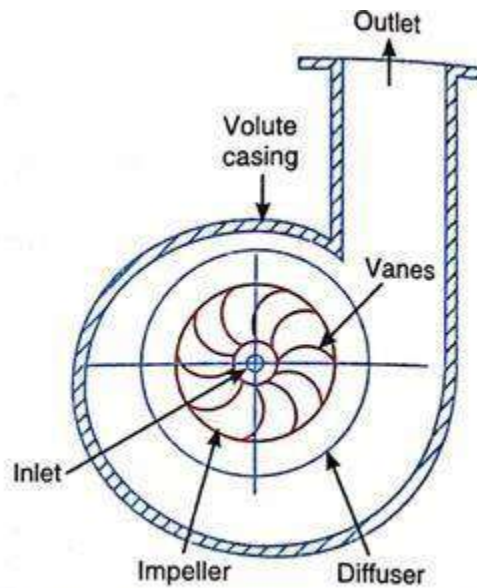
Rotating blade type rotary compressor.
